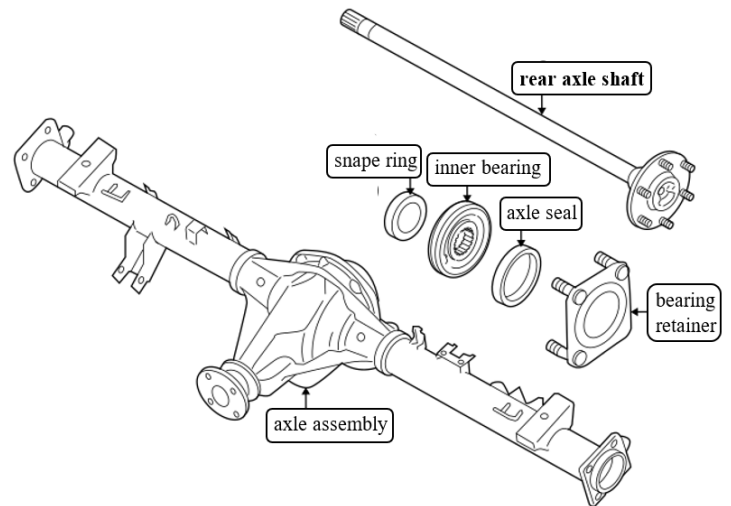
Axle is a part that drives rear wheel of truck [9].
